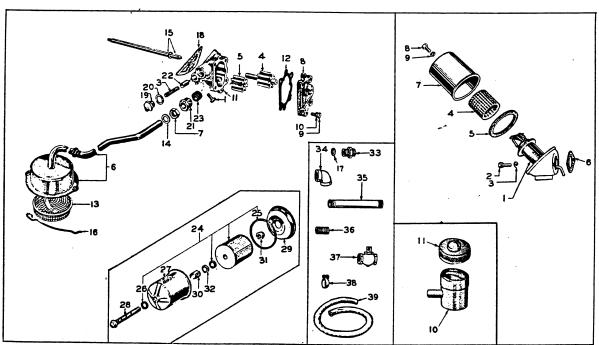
OIL PUMP & OIL FILTER GROUP
